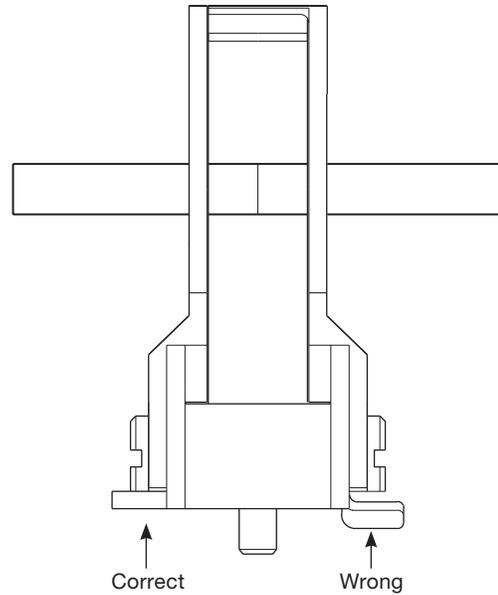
Checking the Weld Joint and Latch Position (Series 4 Fixture)
